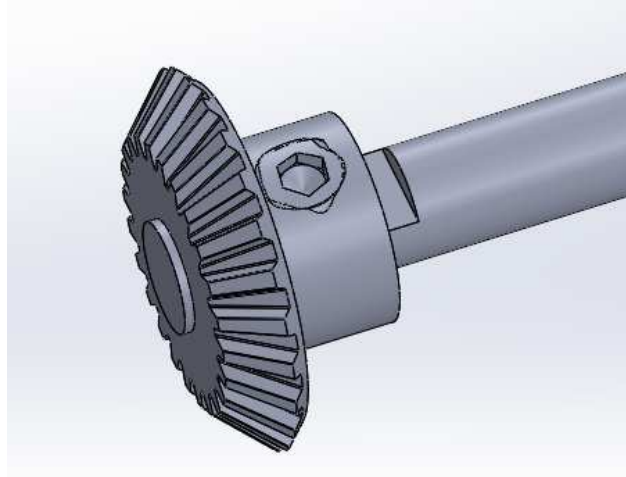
28: Example of using a set screw to mount the bevel gear on the shaft.
